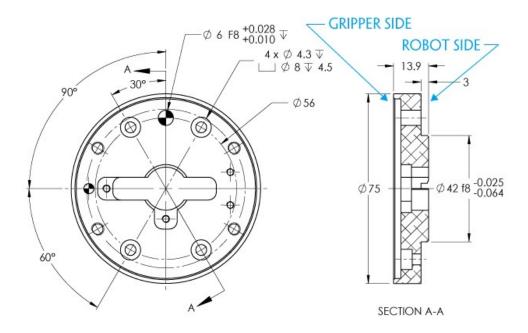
Coupling for PCD 56 mm with 6 x M4 clearance.
